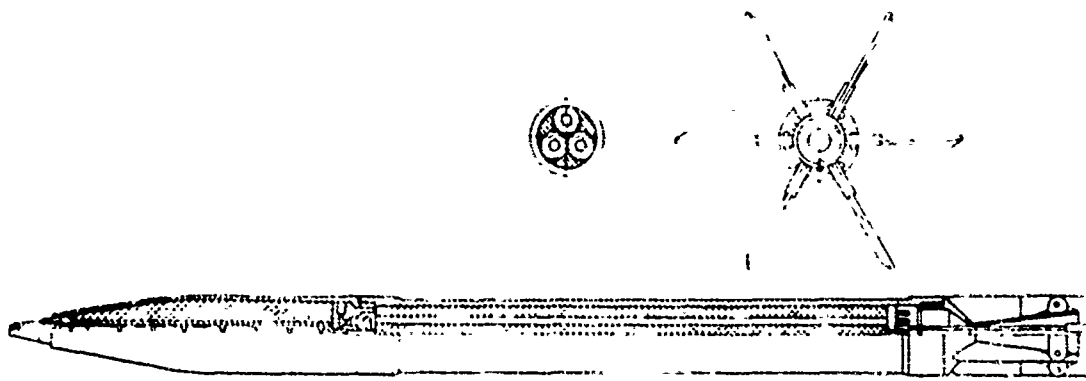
Air-launched missile with unfolding fin assembly.
